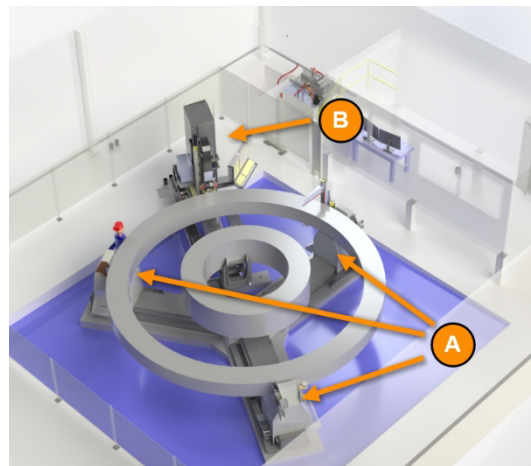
The testing system contains three roller blocks (A) and the carriage with the mounted probes (B)
